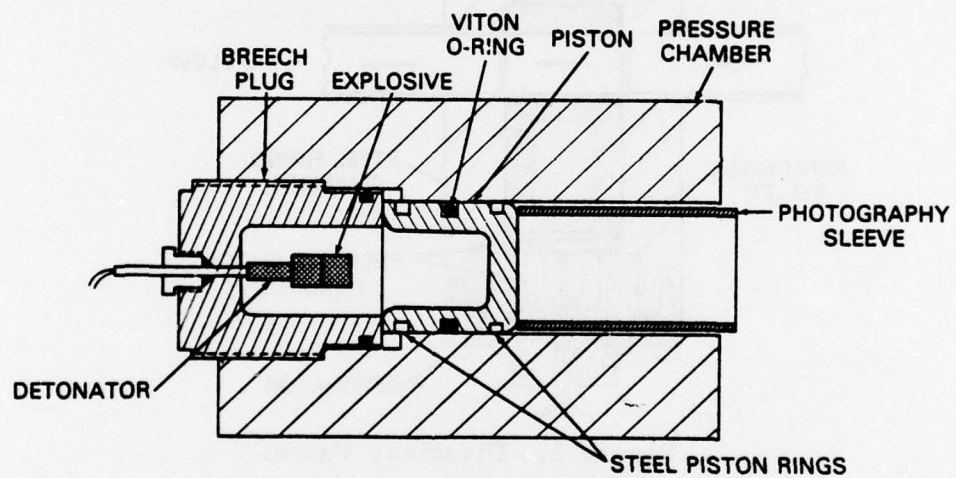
NRL - H. E. Driven Piston Test Assembly.
